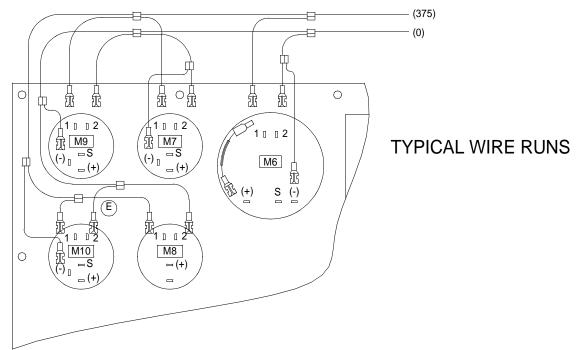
MCS Operator Cab Lower Control Panel Wiring.
